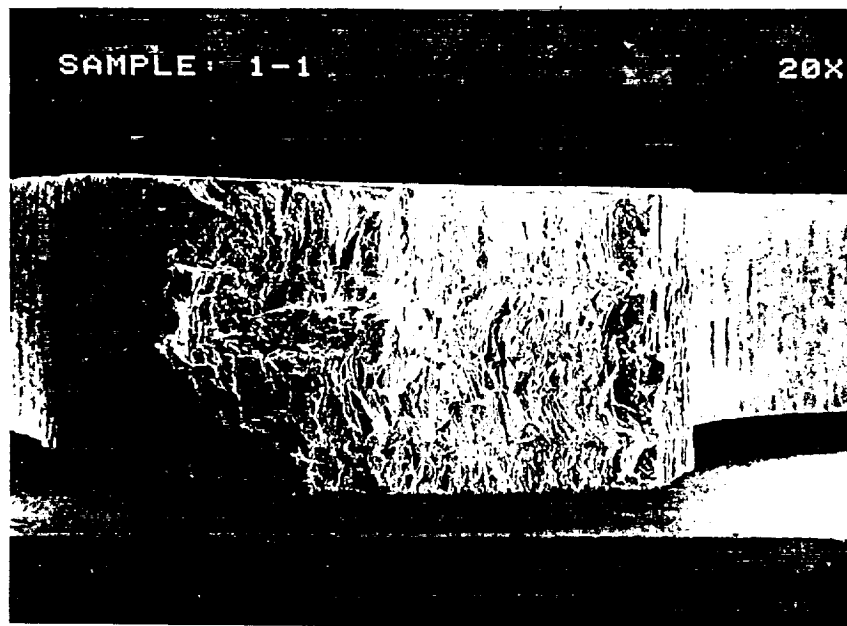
SEM view of fracture in tensile specimen 1-1, 75F, as deposited. 20X.
